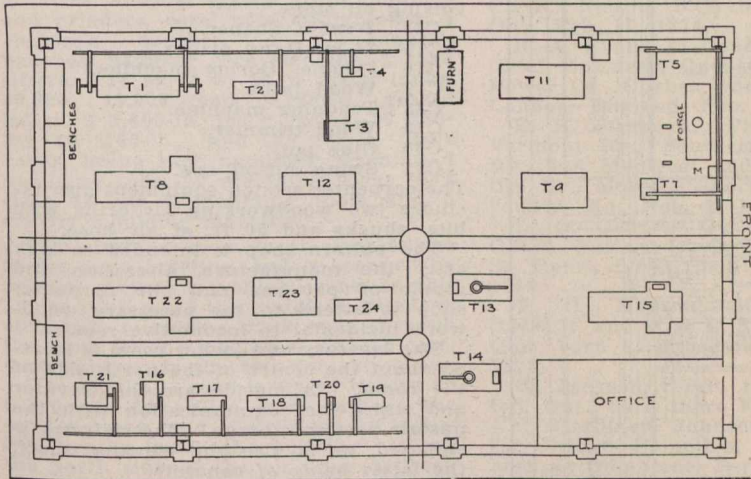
Plan and Tool Layout of Frog and Track Shop.
